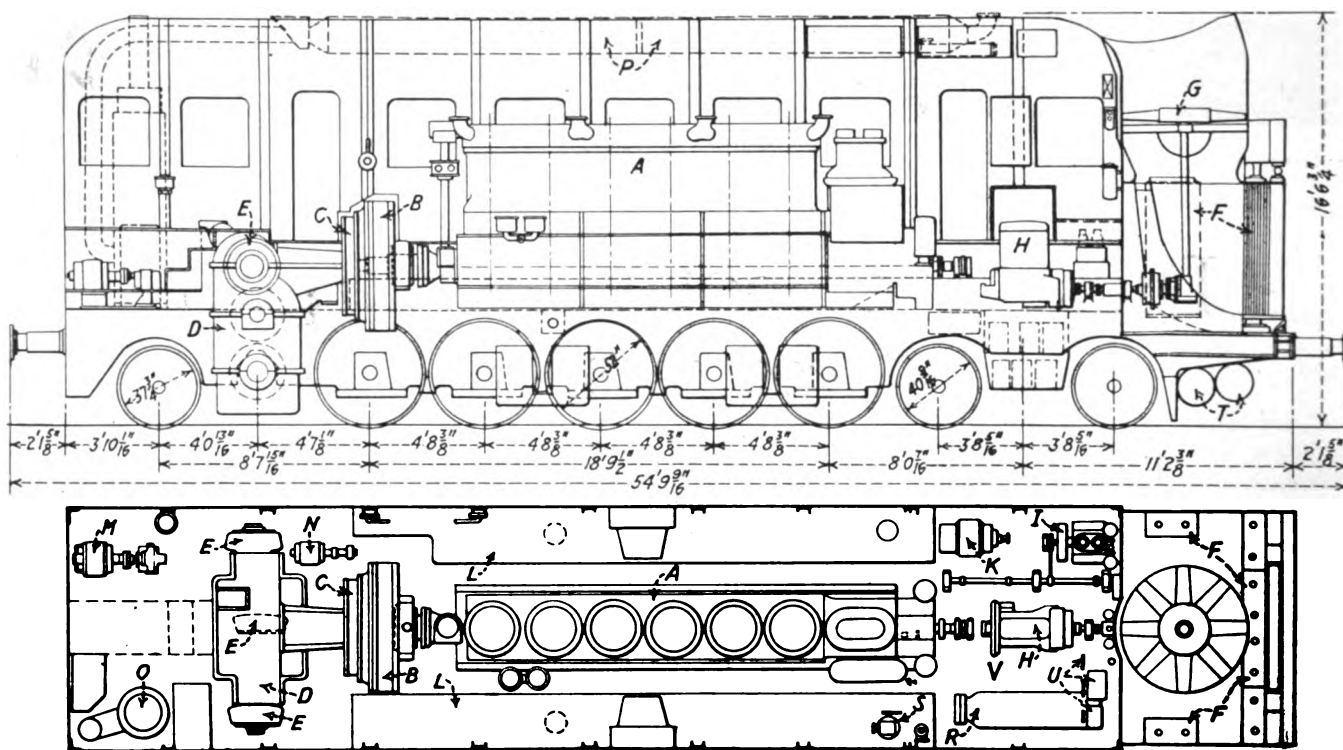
Arrangement of equipment in the 1,200-hp. Diesel locomotive with mechanical transmission
